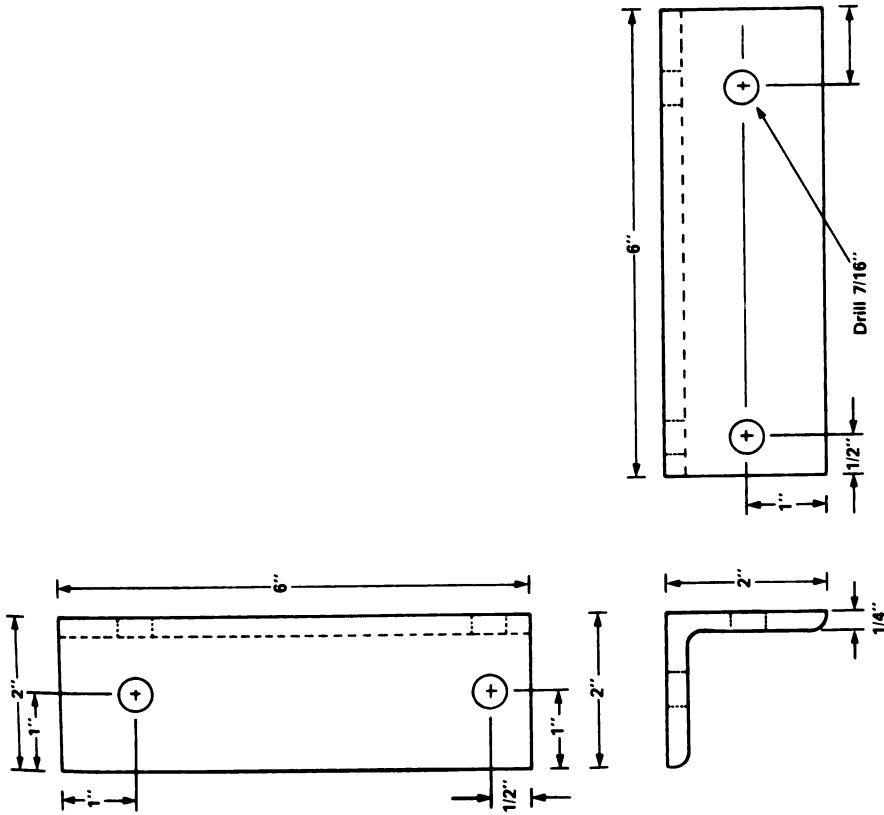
Corner joints—2- by 2-inch steel angle. Cut and drill as shown.
